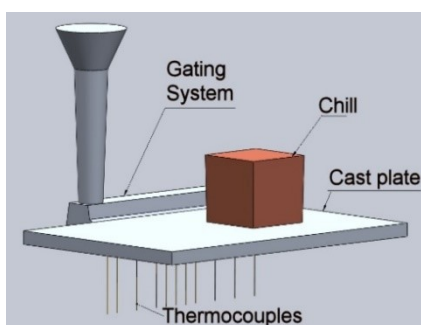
Schematic presentation of the system of the horizontal plate casting, of dimensions 160x240x10/15 mm [1]
